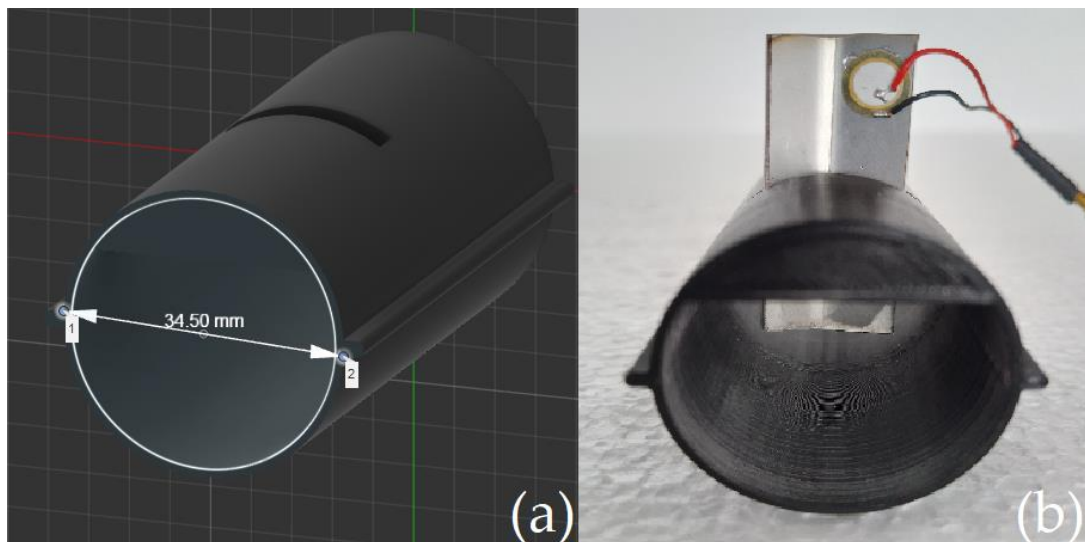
(a) Designed 3d printable plastic mounting apparatus (b) placement of piezoelectric element and metal waveguide on the mounting apparatus
